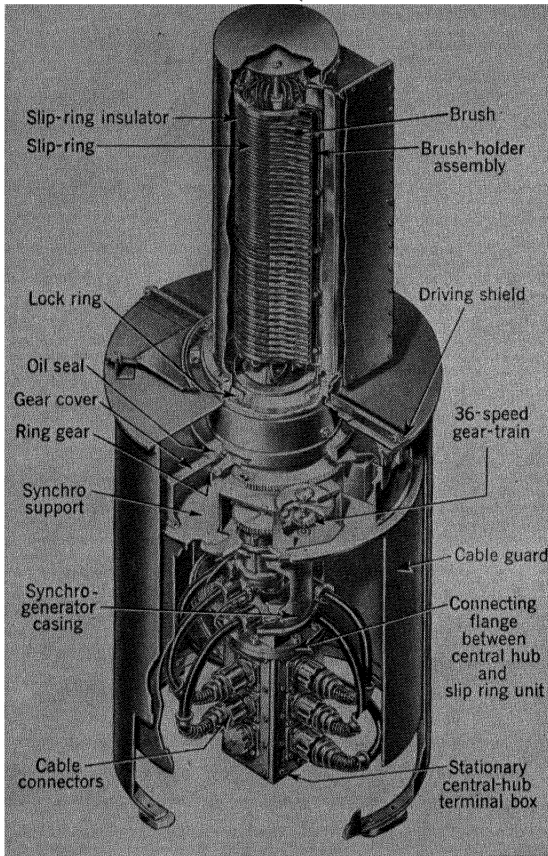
V-beam mount. Slip-ring assembly, cut-away view.
